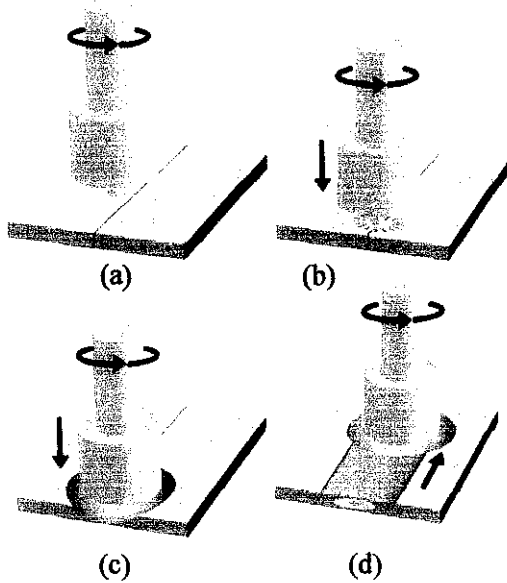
Processes in friction stir welding: (a) rotating tool prior to penetration into the butt joint; (b) tool probe makes contact with the part, creating heat; (c) shoulder makes contact, restricting further penetration while expanding the hot zone; and (d) part moves under the tool, creating a friction-stir-weld nugget (Mahoney, Rhodes, Flintoff, Spurling, & Bingel,
